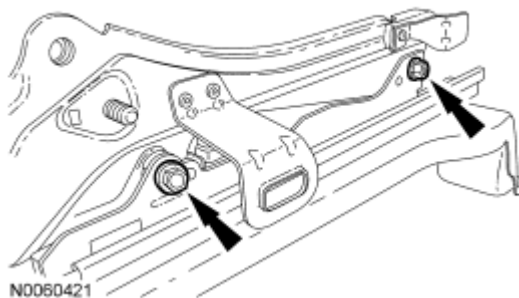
Identifying OCS Weight Sensor Bolt Nuts
